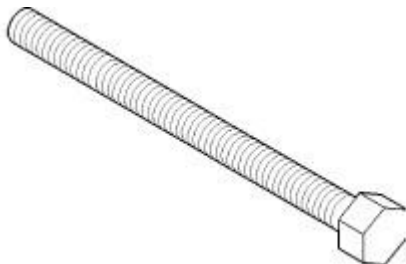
Crankshaft Damper Installer Bolt C-4685-C1
